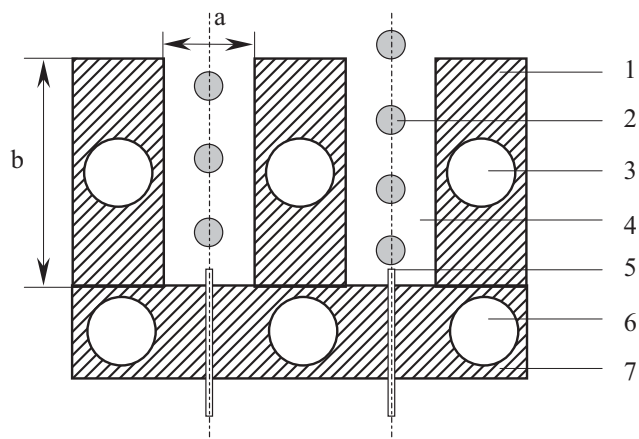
The structure of combined distributor; 1. heating board; 2. wax drop; 3. heating hole; 4. granulation hole; 5. nozzle; 6. heating/cooling hole; 7. switch board; a = 12 mm; b = 20 mm.
